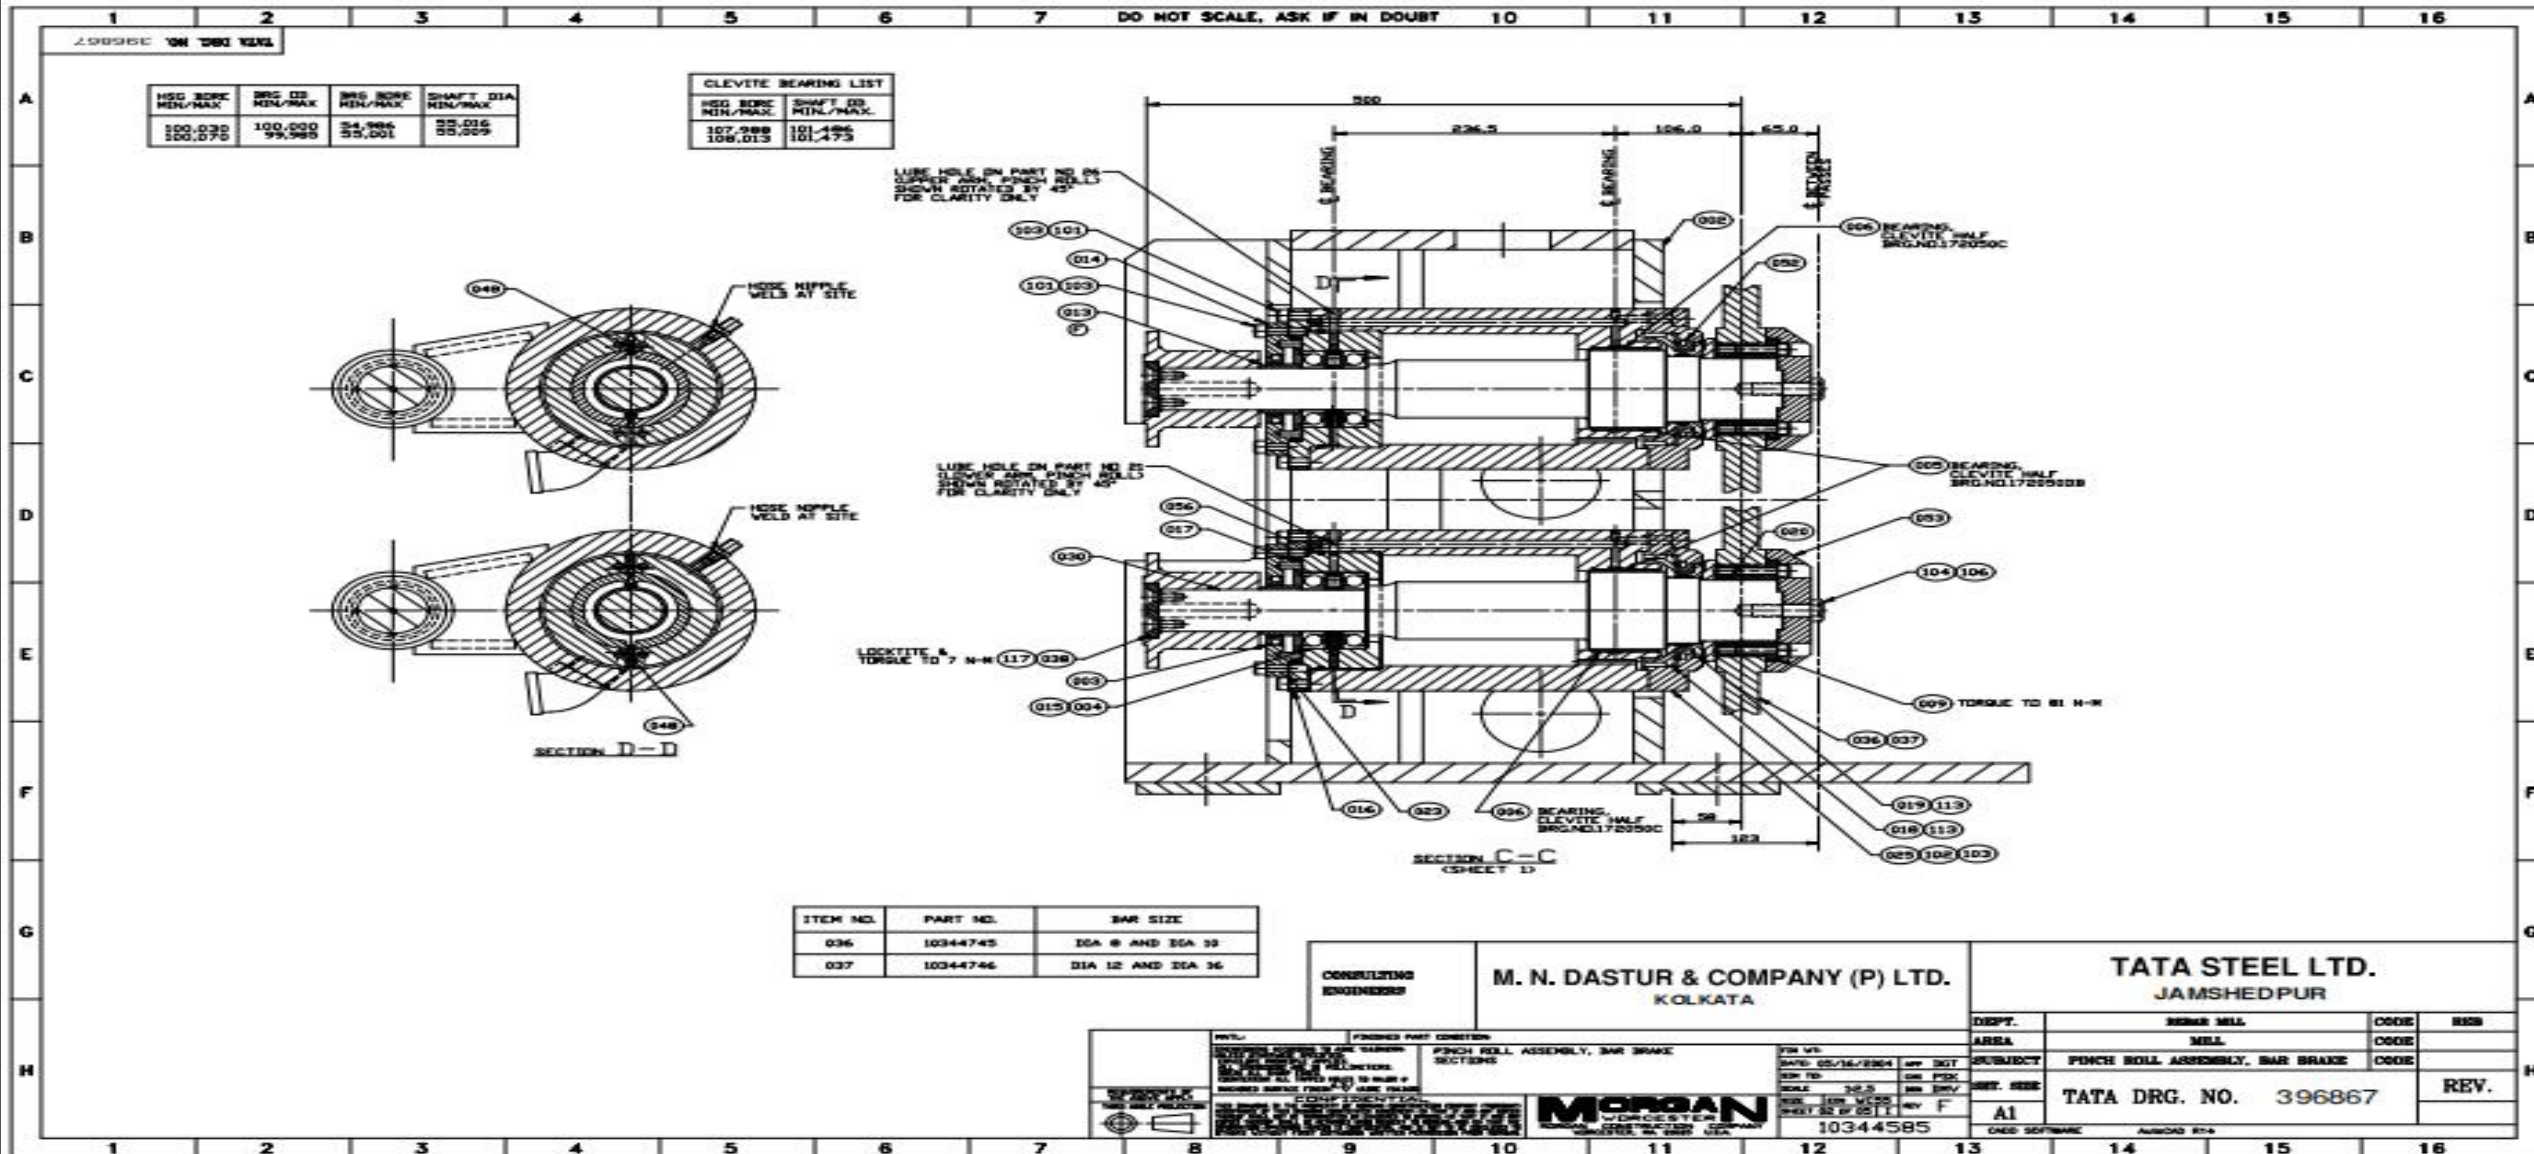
Top View Drawing of Bar Braking Pinch Rolls Assembly drawn in AutoCAD
